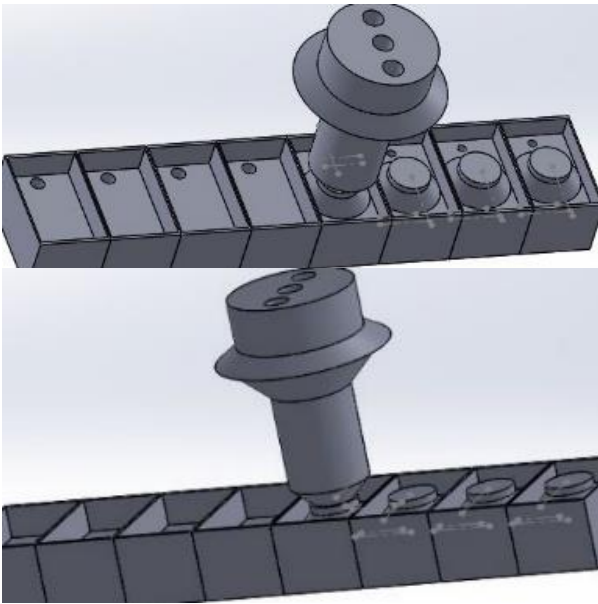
SolidWorks 3D drawing of rubber key tape and packaging simulation.
